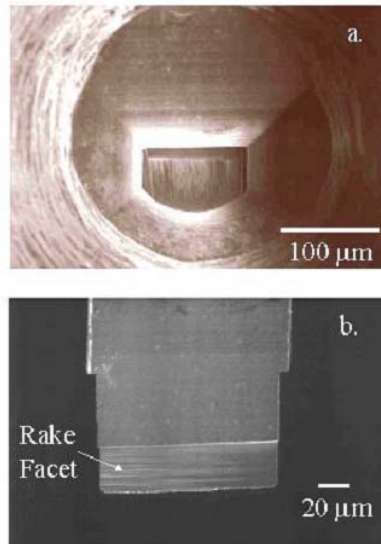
Custom ground tool after shaping by ion sputtering. Images show a view along the tool axis (a) and perpendicular to the tool face (b). Ions are used to define sharp cutting edges, relief and a rake facet.
